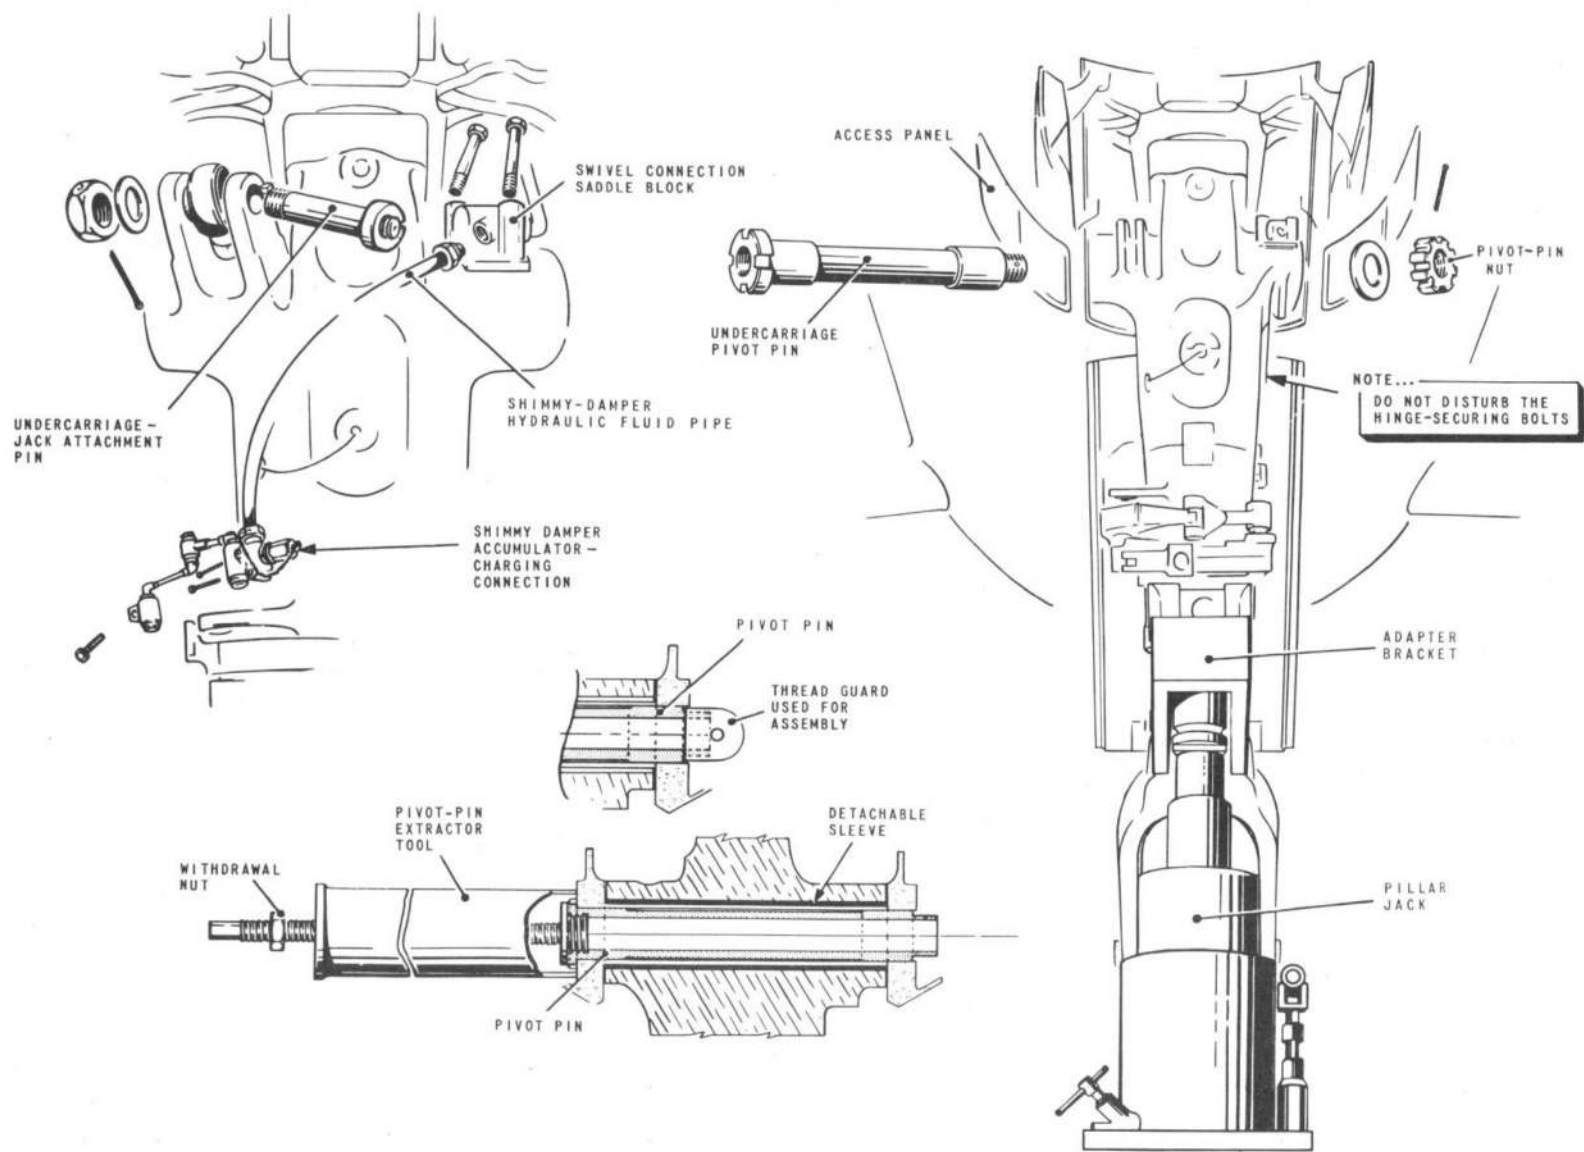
NOSE UNDERCARRIAGE - REMOVAL AND ASSEMBLY
